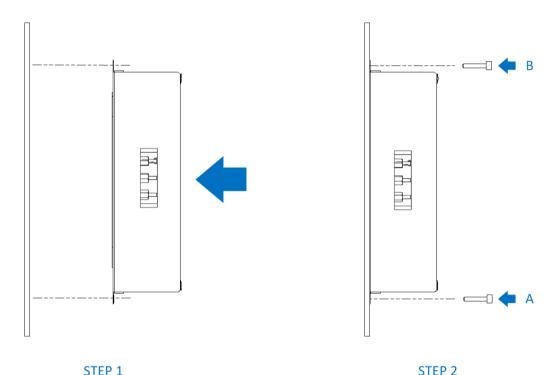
Mechanical Mounting of Capacitor Module for a Duct and Recessed Mount
